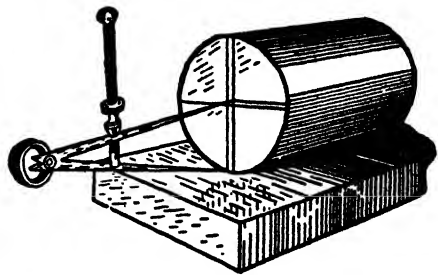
Locating a center with dividers. (South Bend Lathe Works)
